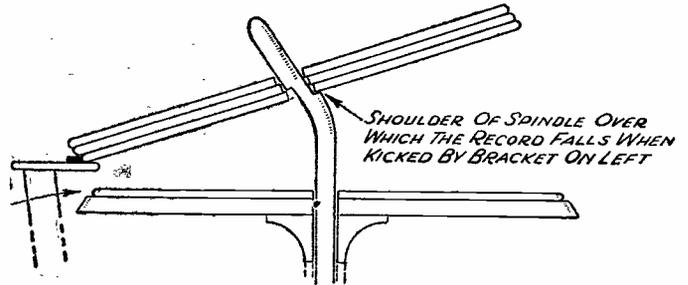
Diagram showing the principle of operation of the latest Garrard mechanism. The little pegs on the arms of the bracket shown on the left cause the bottom record to be shifted slightly to the right, thus passing over the shoulder of the spindle.
